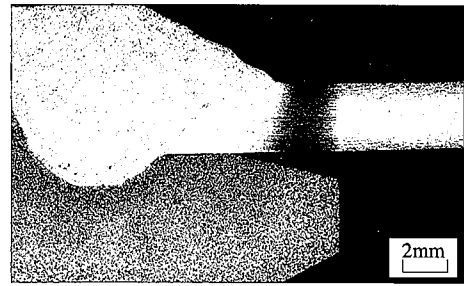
Cross section of arc weld (t = 2.6 mm)
